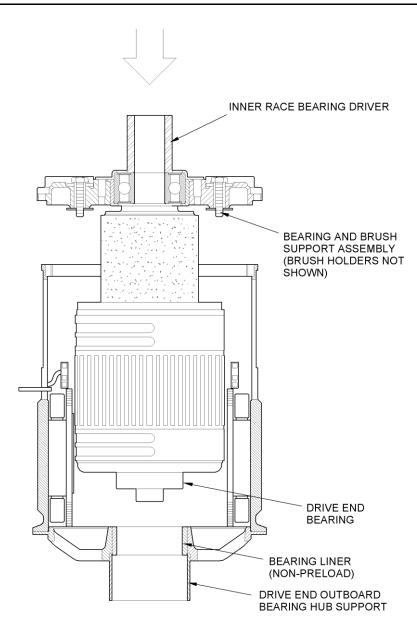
Pressing the Bearing and Brush Support Assembly with Attached Armature into the Stator and Housing Assembly (Non-Preload)
